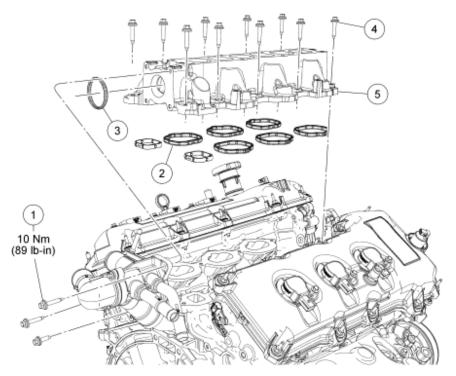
Identifying Bolt Sequence Courtesy of FORD MOTOR CO.
